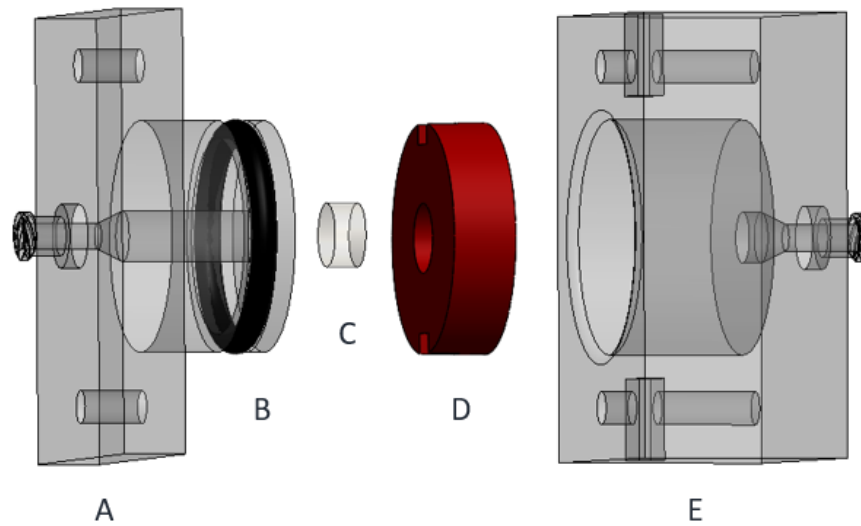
Exploded view of the permeability chamber assembly for tests on rigid samples: A) upper part, B) o ring, C) rigid sample, D) gasket, E) bottom part
